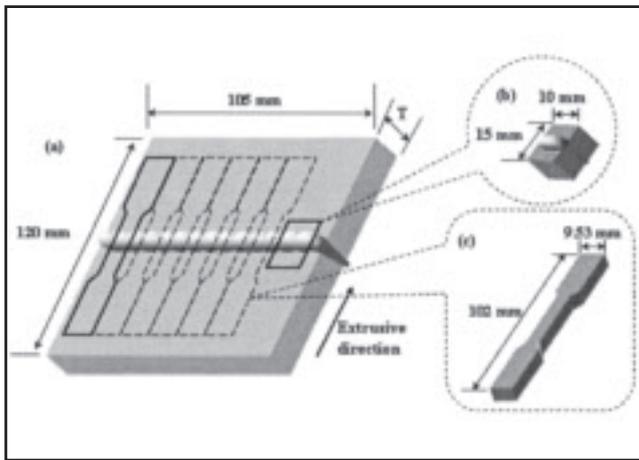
Sketch of EB-welded magnesium alloy specimen for different testing purposes.
